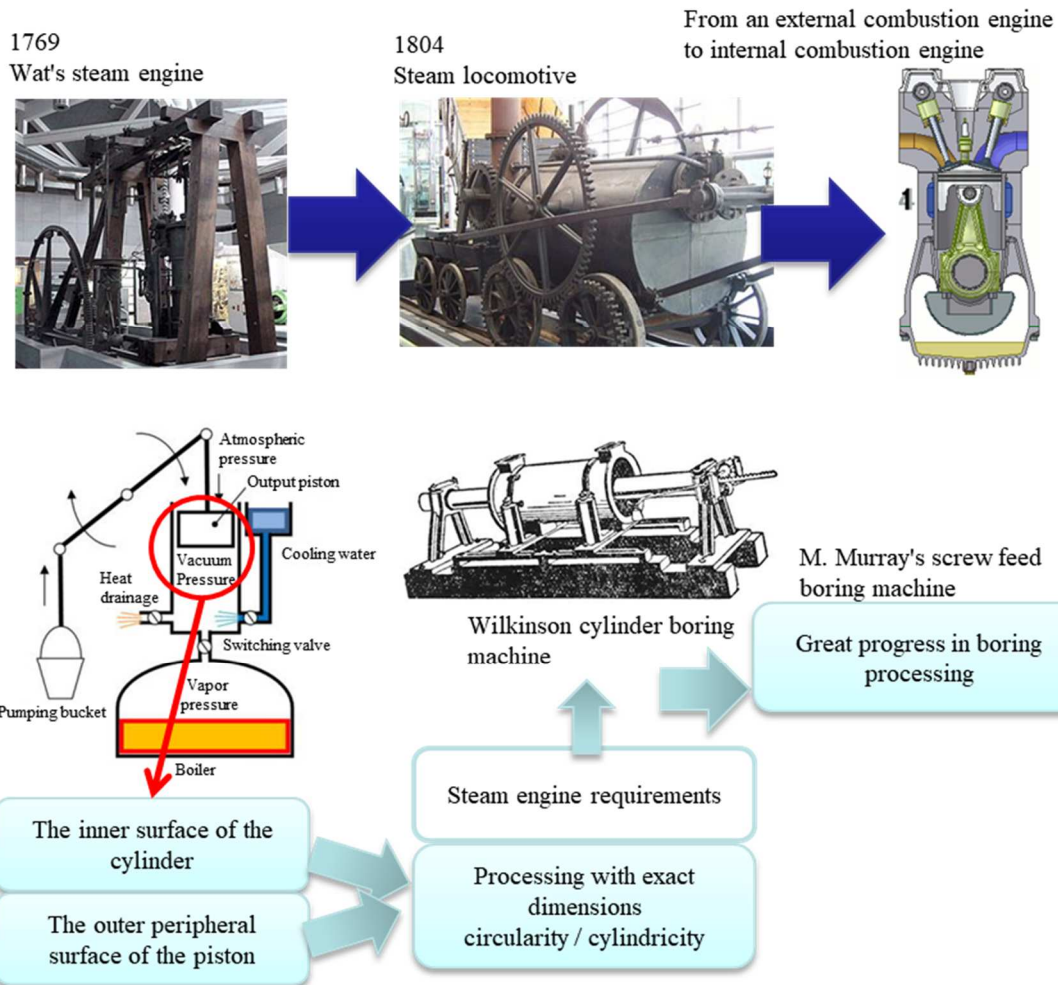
History of machine tools - Steam engine and machine tool -
